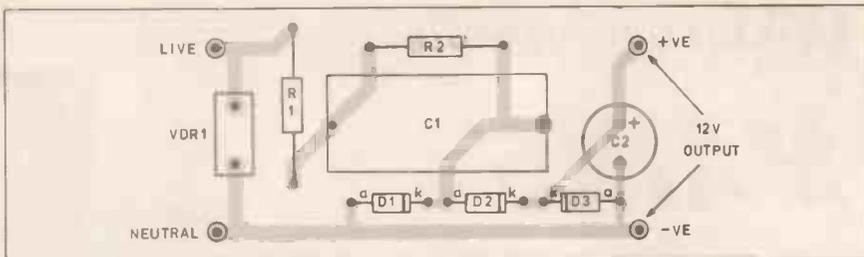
Printed circuit board component layout and full size foil master for the 12V Capacitive PSU. The extra board space at each end allows it to safely slot into its case.
